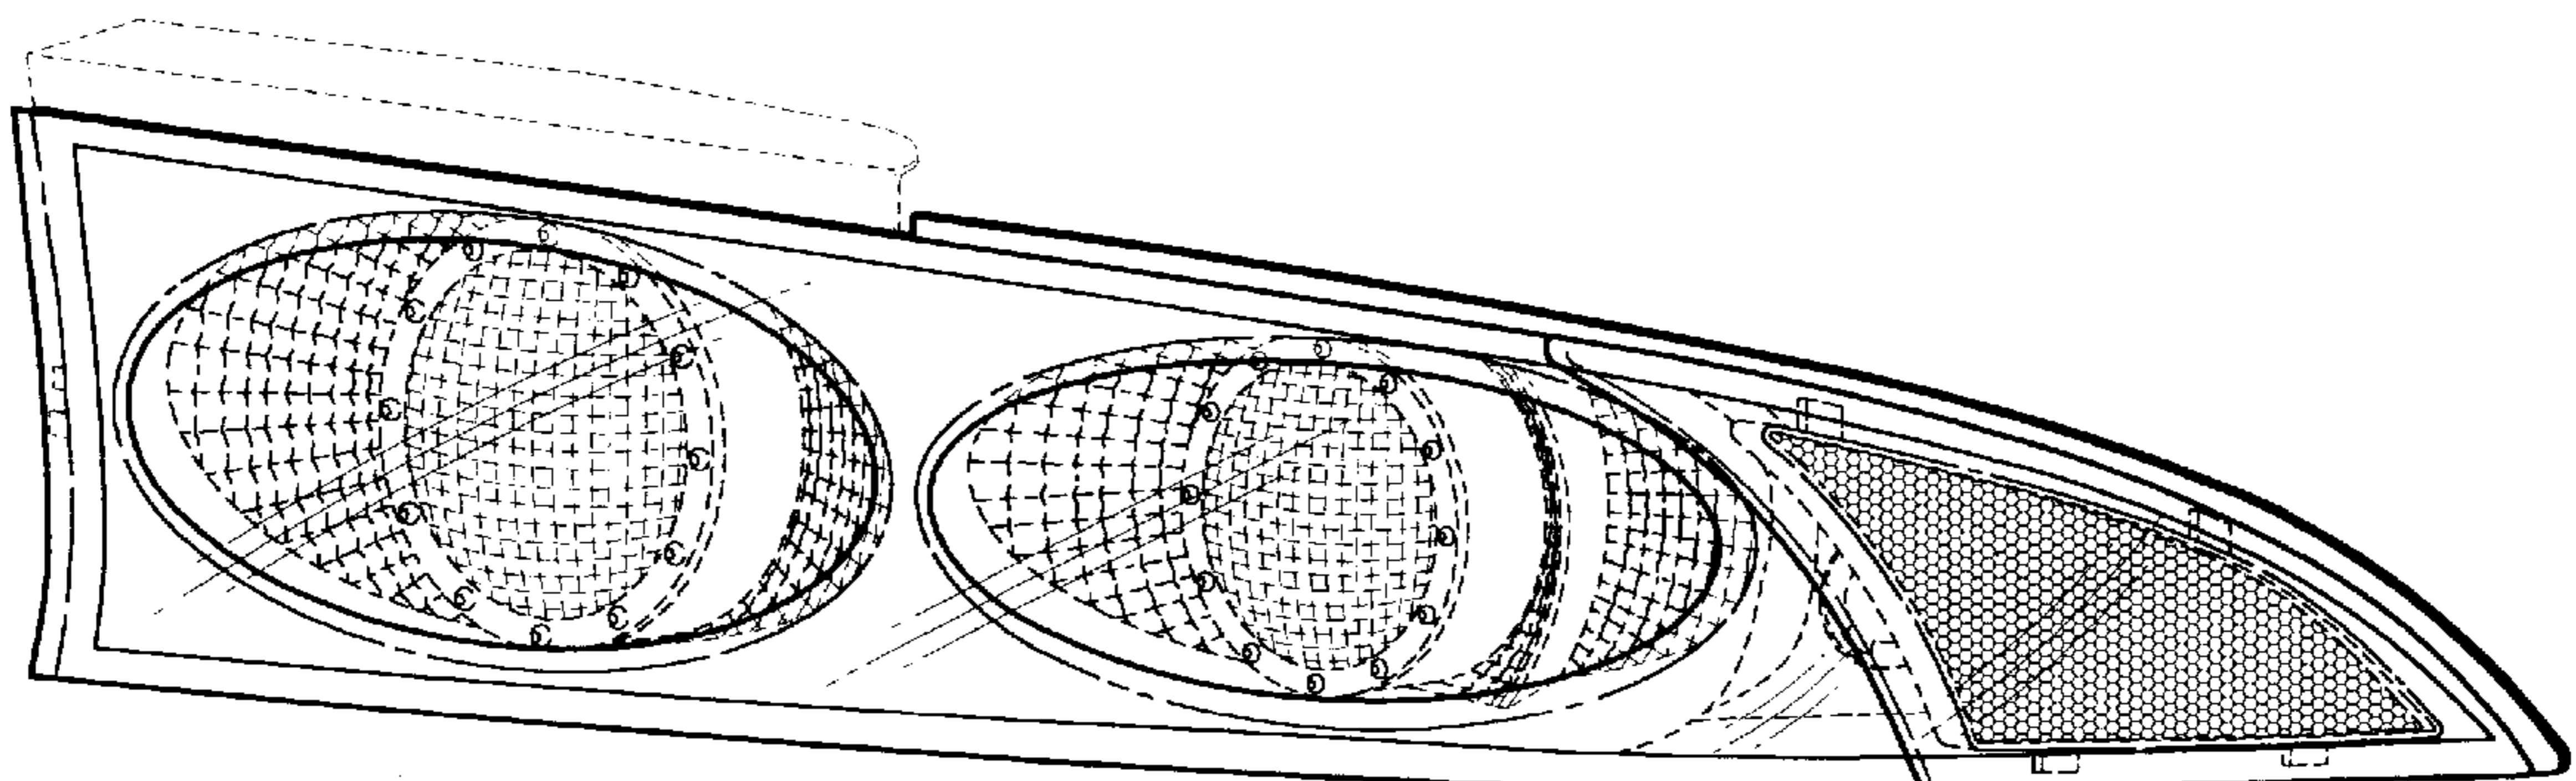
is a right-side elevational view of the tail lens assembly of FIG. 1;
